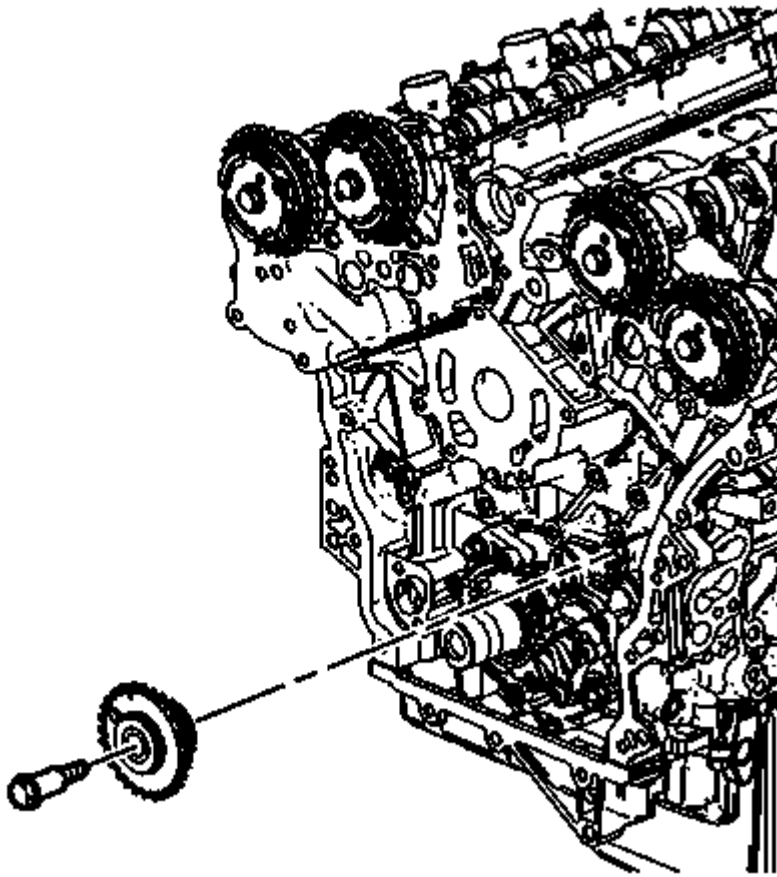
View Of Left Camshaft Intermediate Drive Chain Idler Sprocket
